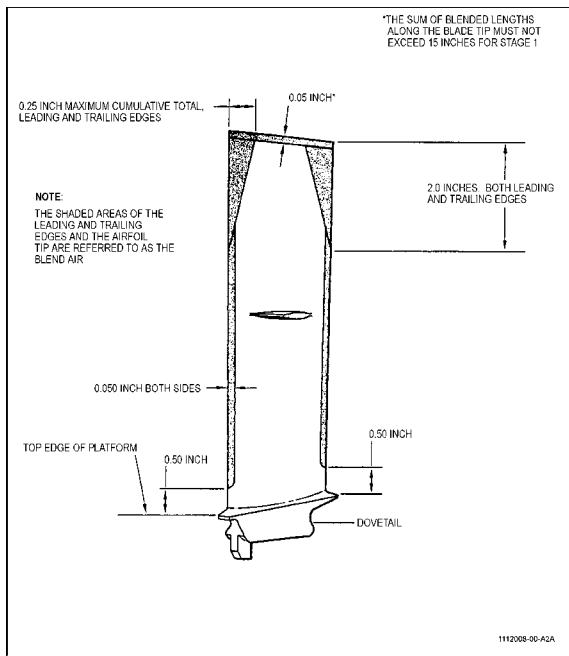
Stage 1 Compressor Blade Inspection Limits
